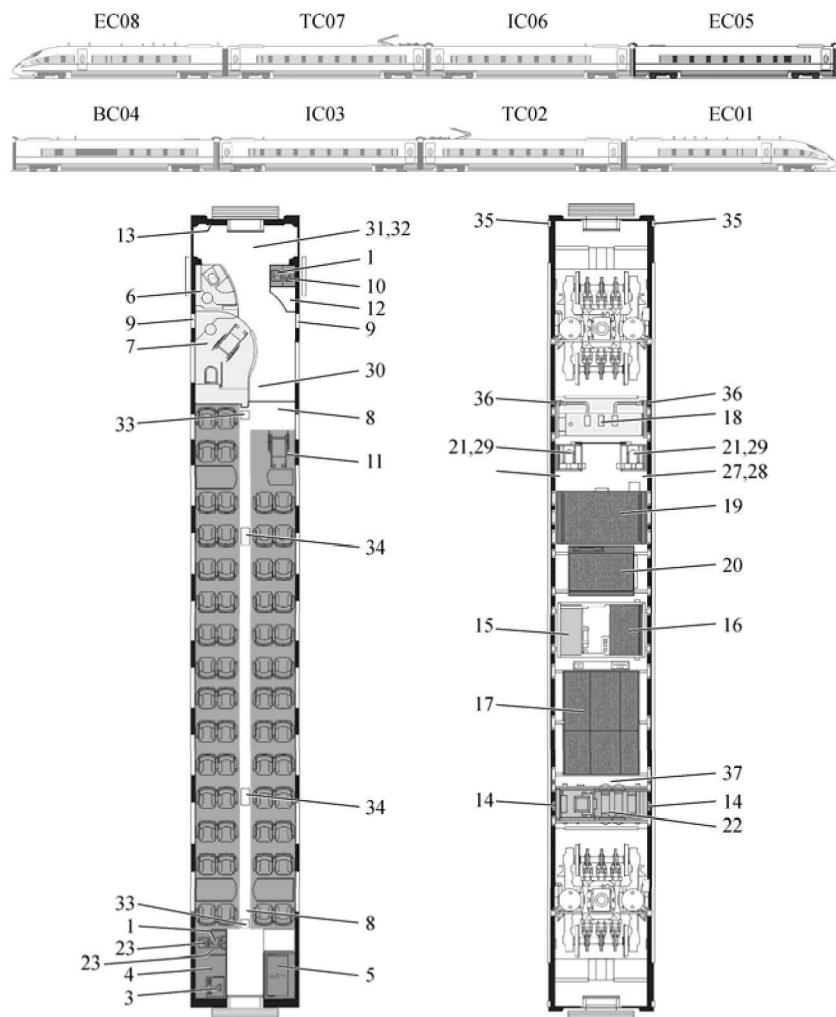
Interior and Underfloor Layout FC05 Car
